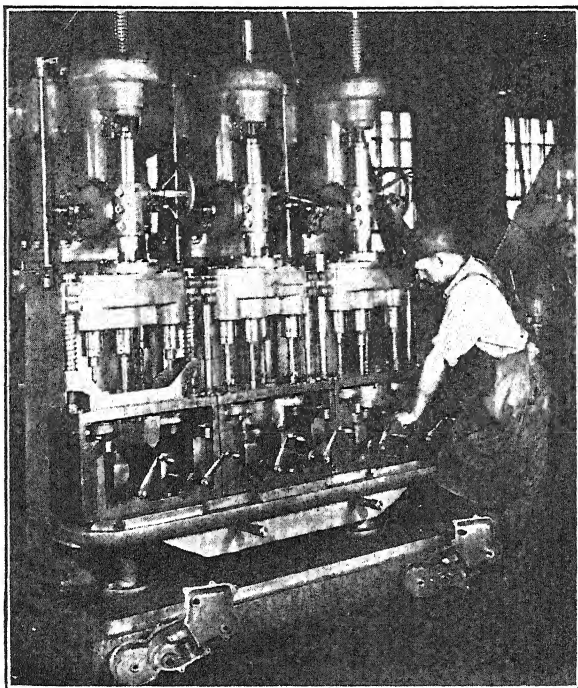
A Barnes Drill Co. Gang-Type Three-Spindle Production Drilling Machine.
